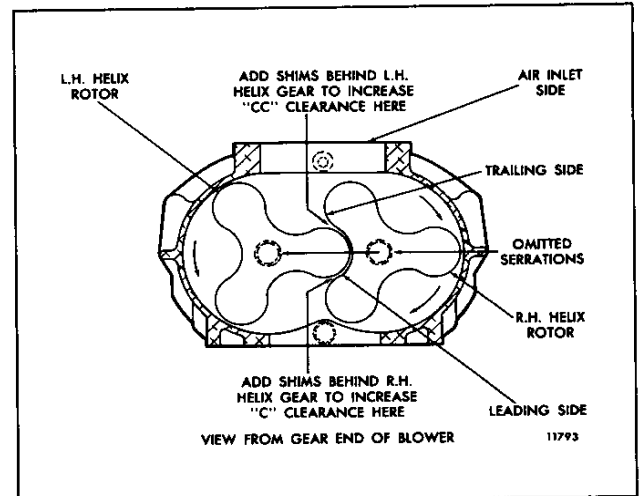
Diagram Showing Proper Location of Shims for Correct Rotor Lobe Clearances
